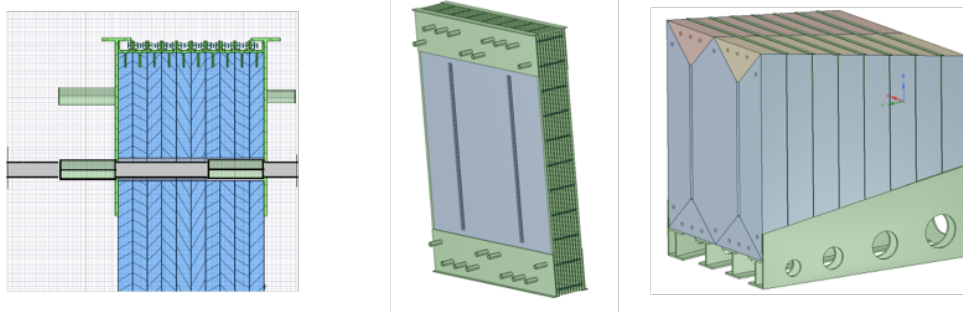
Preliminary mechanical design of magnets. GO steel sheets are packed into sections about 50 mm thick (left). Packs are bolted together into rectangular block about 50 cm thick (left, central). blocks of different dimensions are installed on the support beams (right).
